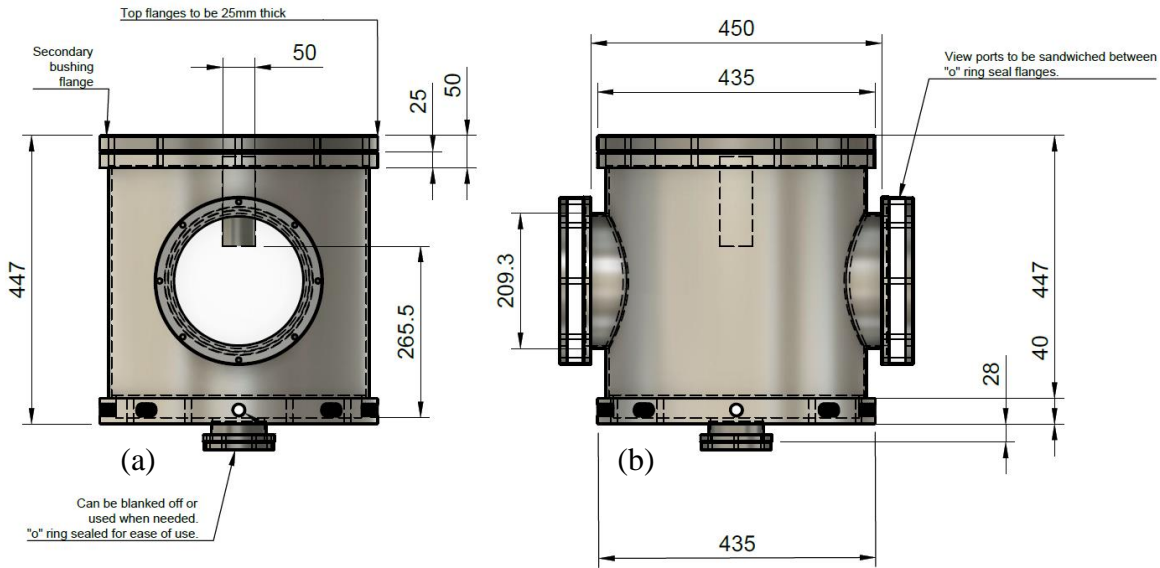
Drawings of pressure vessel with dimensions (a) front view and (b) side view.
